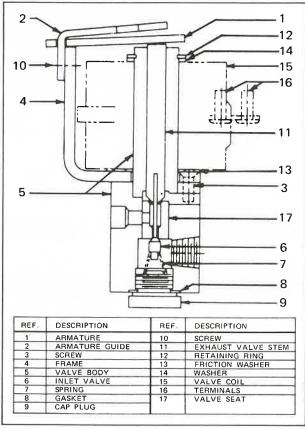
SECTIONAL VIEW OF MAGNET VALVE.
